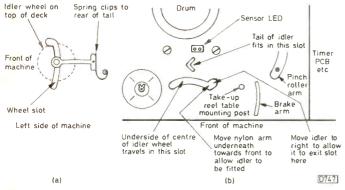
Replacing the idler. (a) Underside of the mechanism (simplified) showing the nylon arm and spring positions when fitting the idler. Machine is on its left-hand side. (b) A simplified view of the upper side of the mechanism, with the take-up reel table and the idler removed.
